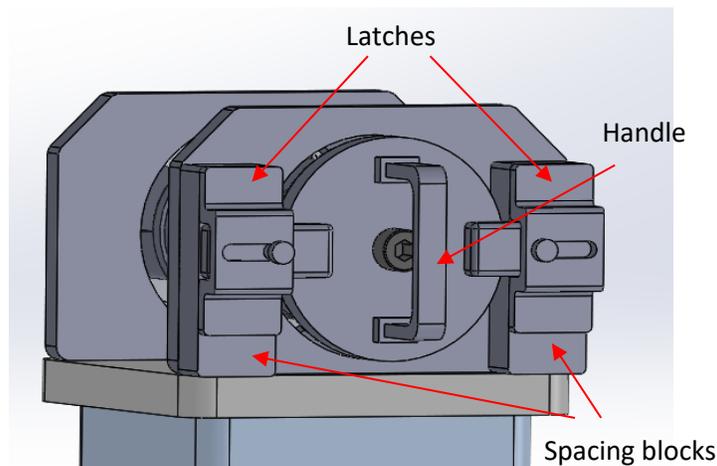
Details of Latches in A-Stand Idle End Design Iteration #2
